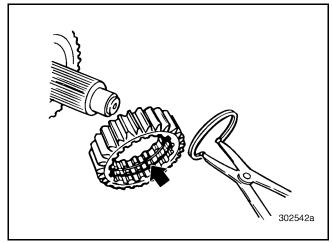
Installing Snap Ring into Fifth Speed Gear
